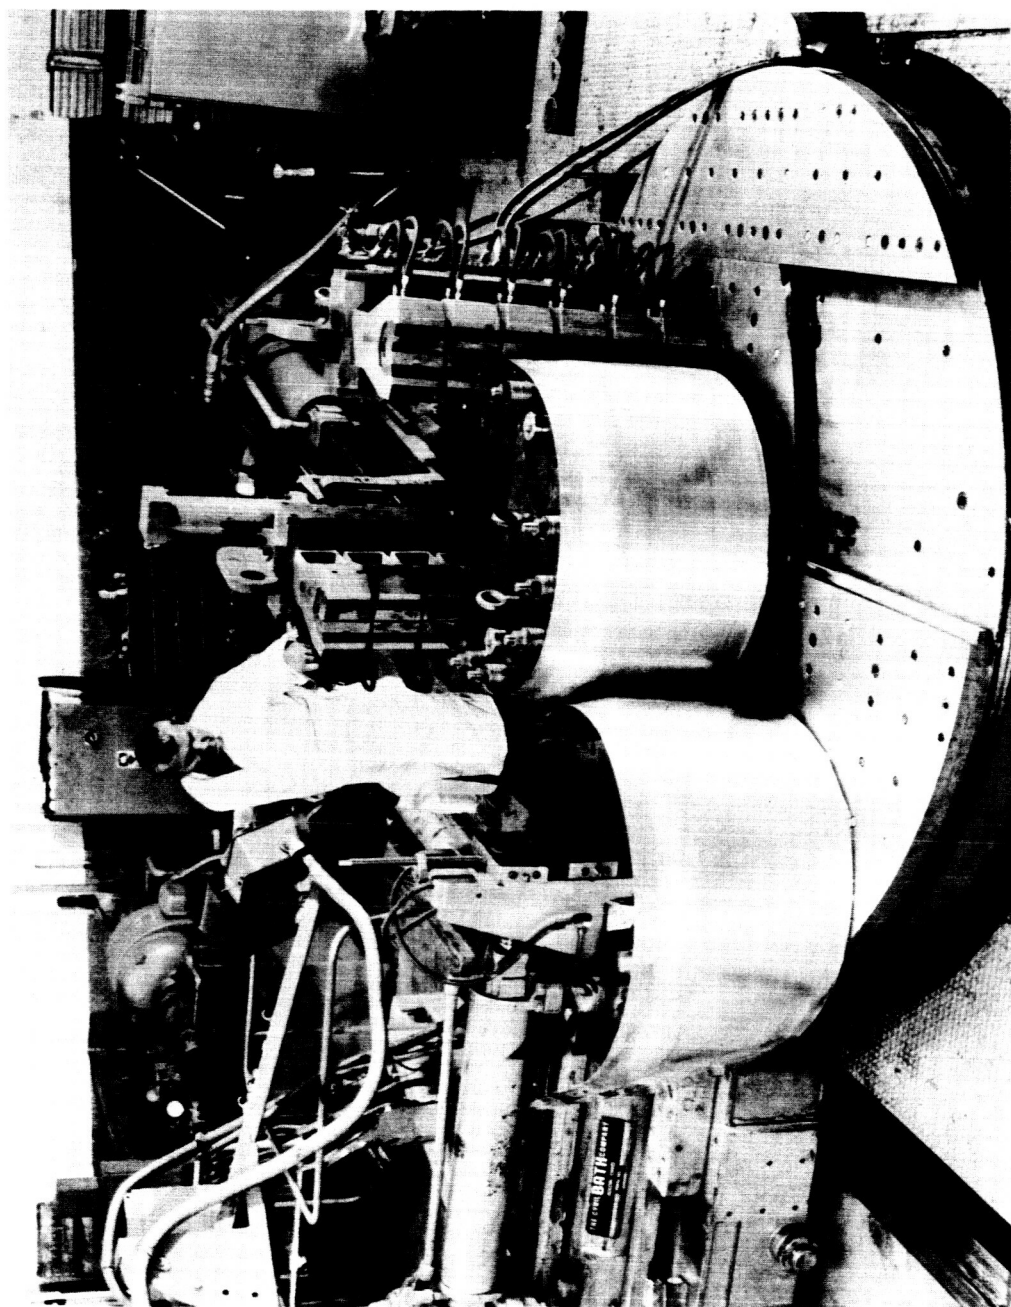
STRETCH-FORMING MACHINE FOR SHEET
